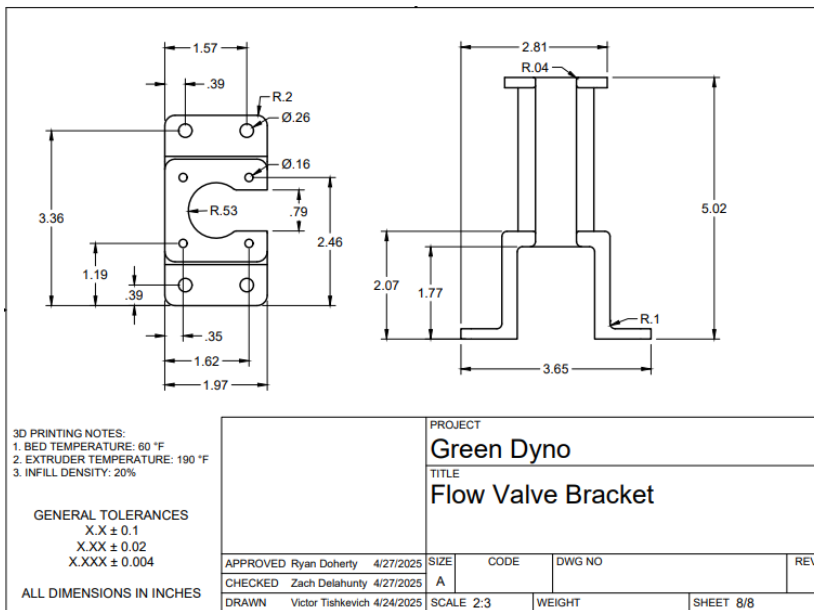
Flow Valve Bracket Manufacturing Drawing
